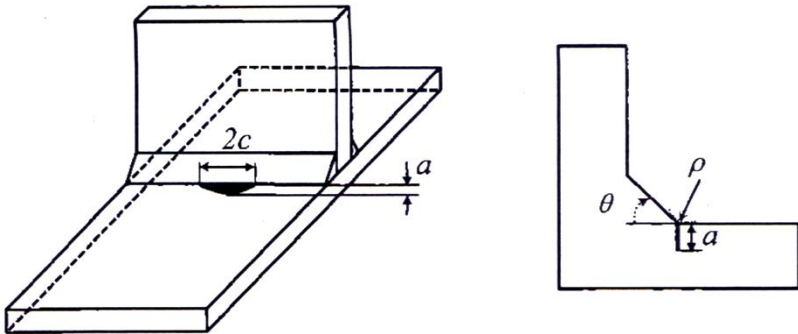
Typical geometry and crack in a fillet welded joint [22]
